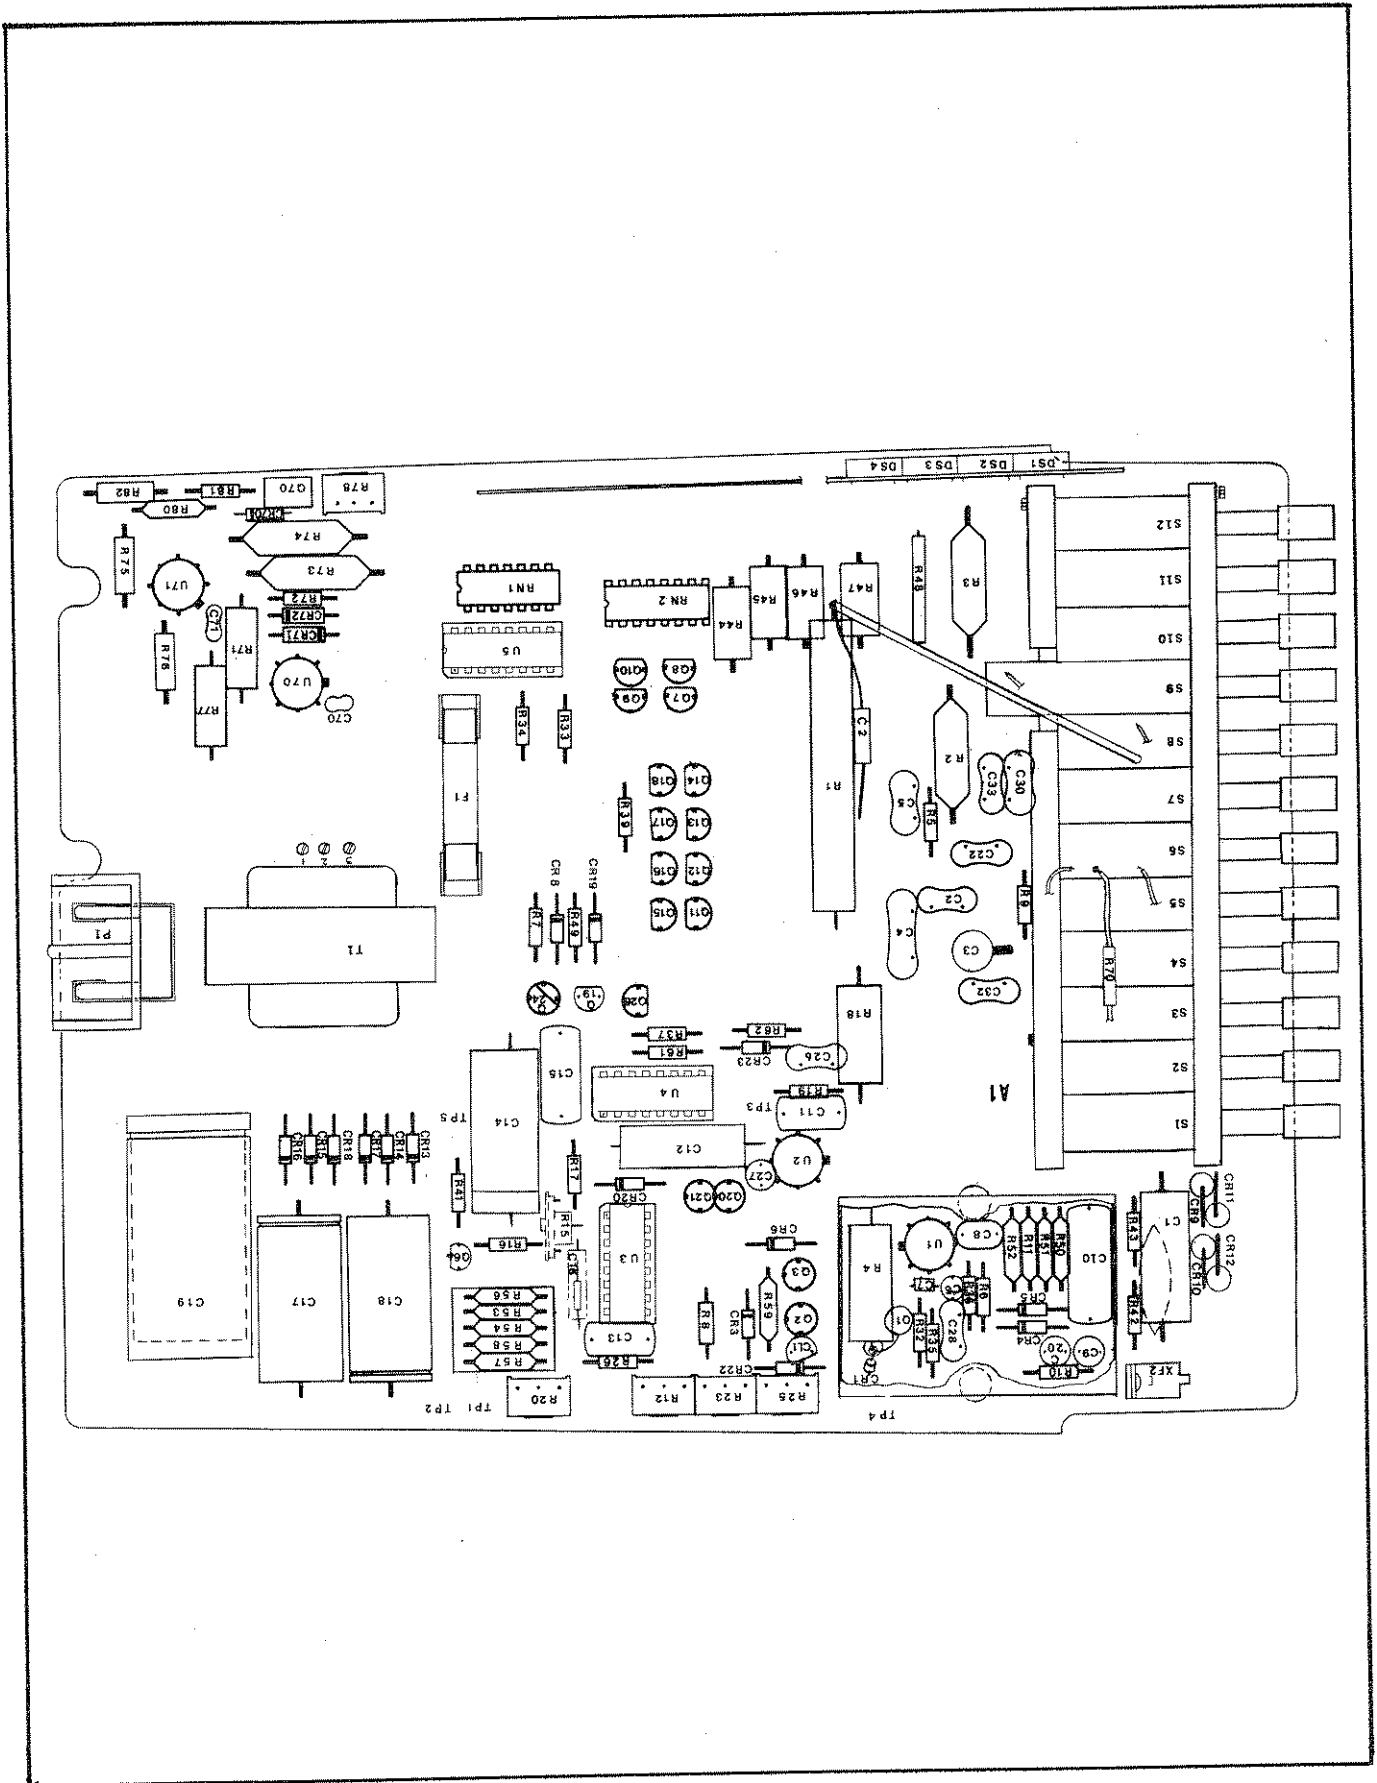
8000A-06 MAIN PCB ASSEMBLY
